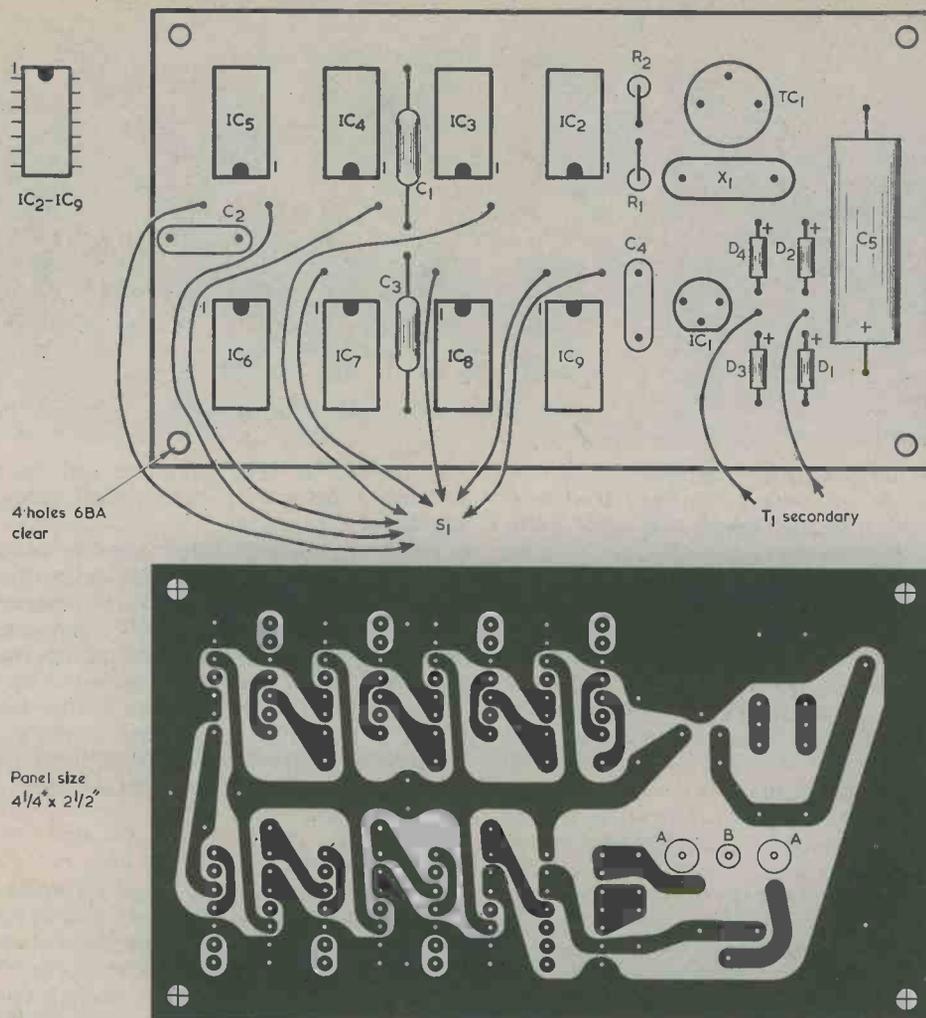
The component and copper sides of the printed circuit board. This is reproduced full size.
